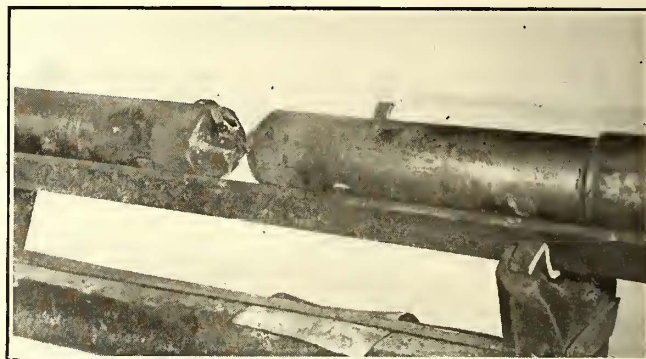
TWO AXLE ENDS IN POSITION FOR WELDING
